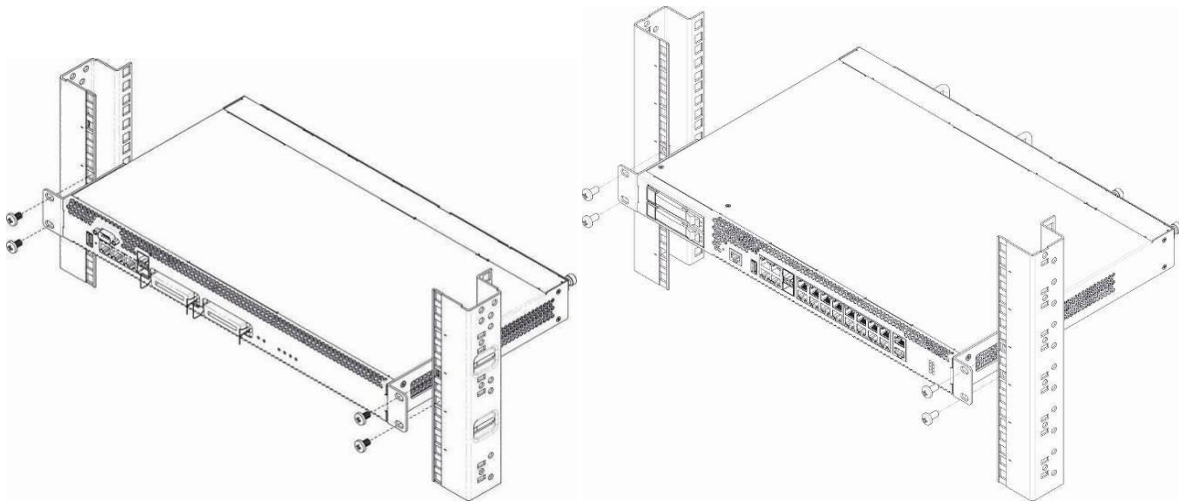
Rack mounting of SBC-1000 (left) and SBC-2000 (right)
